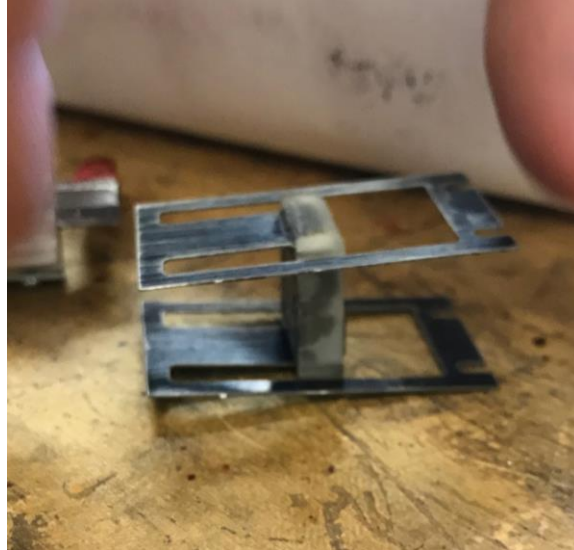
FLEXURE AND MAGNET HOLDER ASSEMBLY
